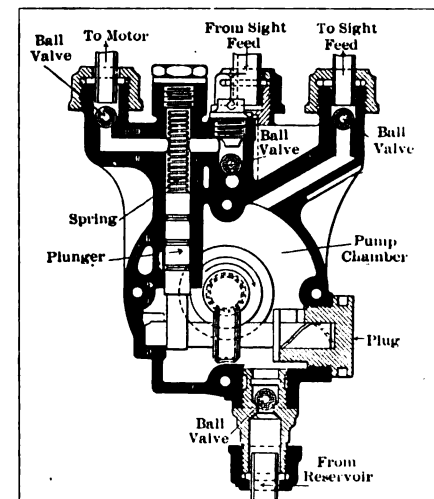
Oil pump on Panhard & Levassor 20-horsepower valveless motor, showing leads, ball checks and plunger
